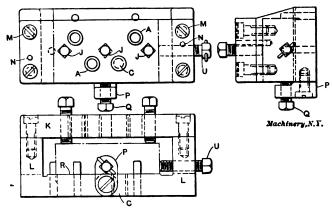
Further Improvements in Jig. suiting it to Manufacturing Purposes
